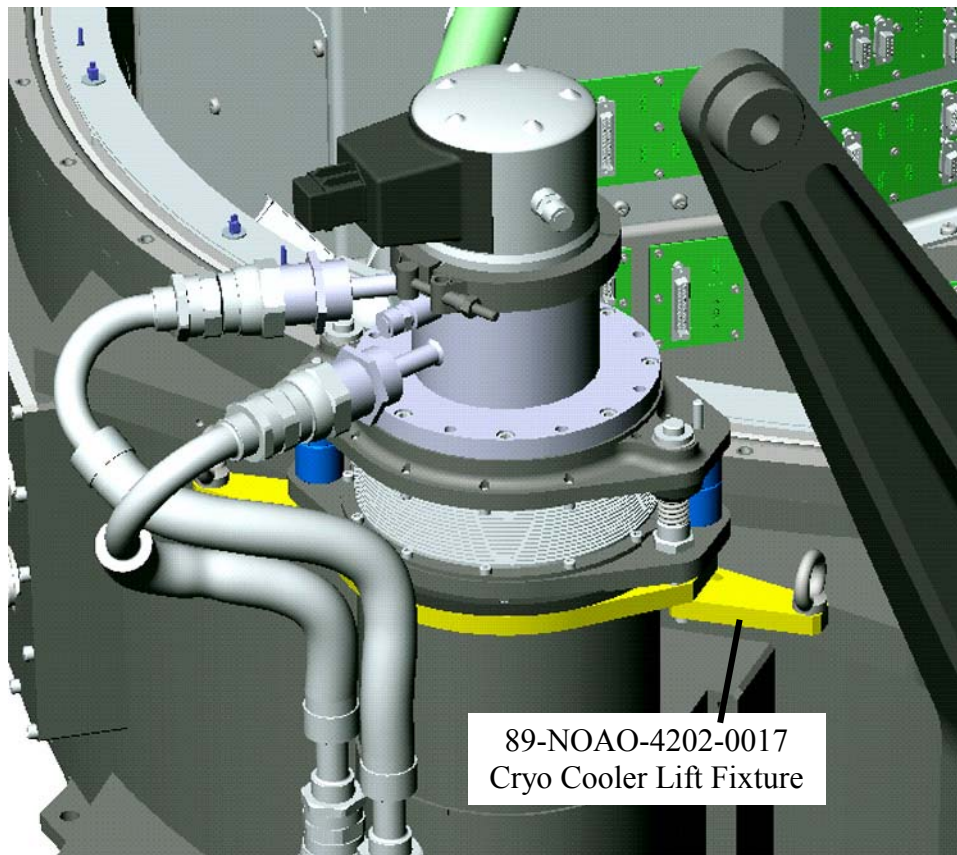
Install 89-NOAO-4202-0017 Cryo Cooler Lift Fixture.
